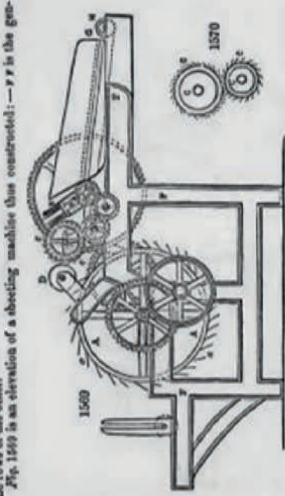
is an elevation of a sheeting machine thus constructed: — *p, p* is the gear-
